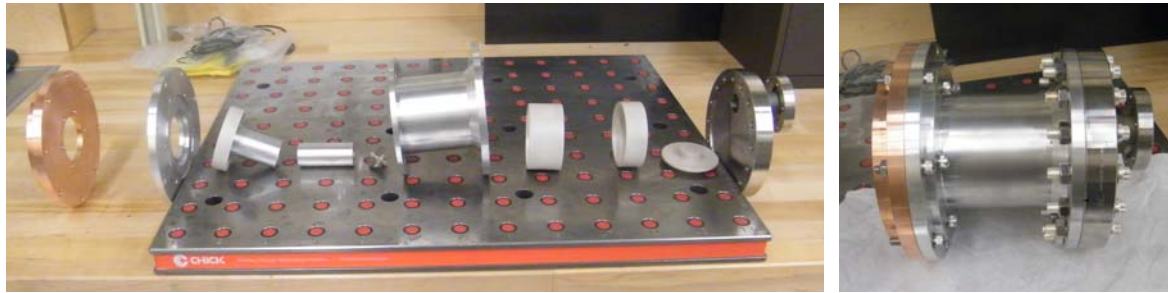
Assembly display and assembled mock magnetron casing for testing the plasma cathode.
